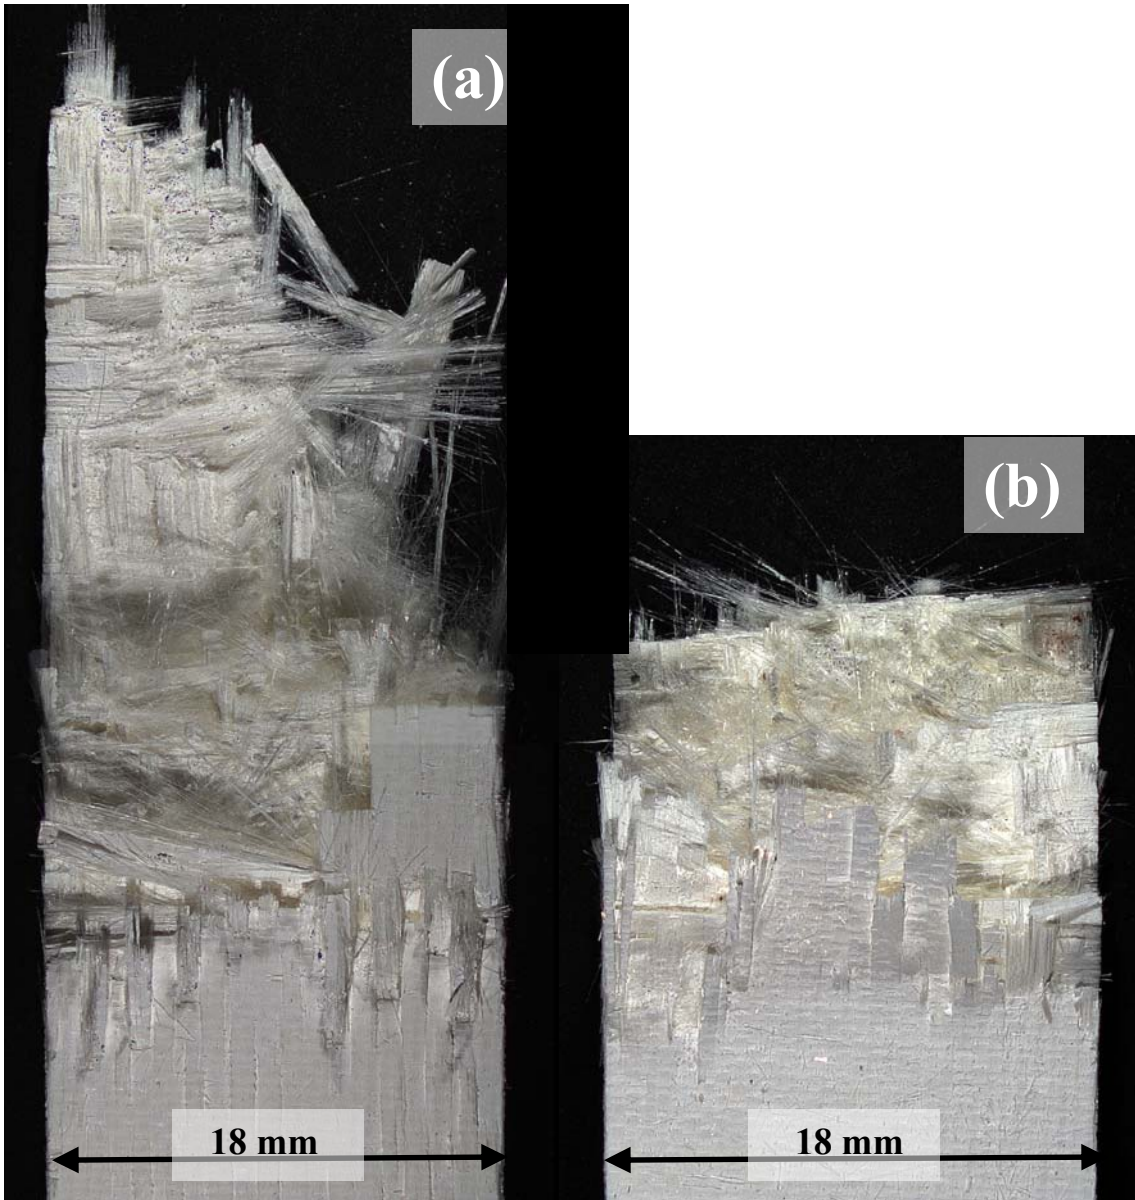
Fracture Surfaces: compression to failure of N720/A specimens failed at a displacement rate of -0.05 mm/s at 1200°C : (a) steam and (b) aged for 25 hours in steam.
